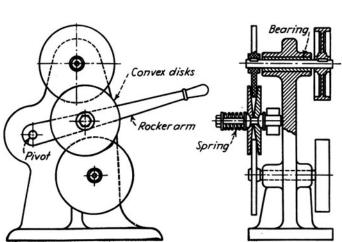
Device for transmitting power between fixed parallel shafts. Convex disks mounted freely on a rocker arm and pressing firmly against the flanges of the shaft wheels by a coiled spring form the intermediate sheave. Speed ratio changed by moving rocker lever. No reverse possible, but driven shaft may rotate above or below driver speed. Convex disk must be mounted on self-aligning bearings to ensure good contact at all positions.
